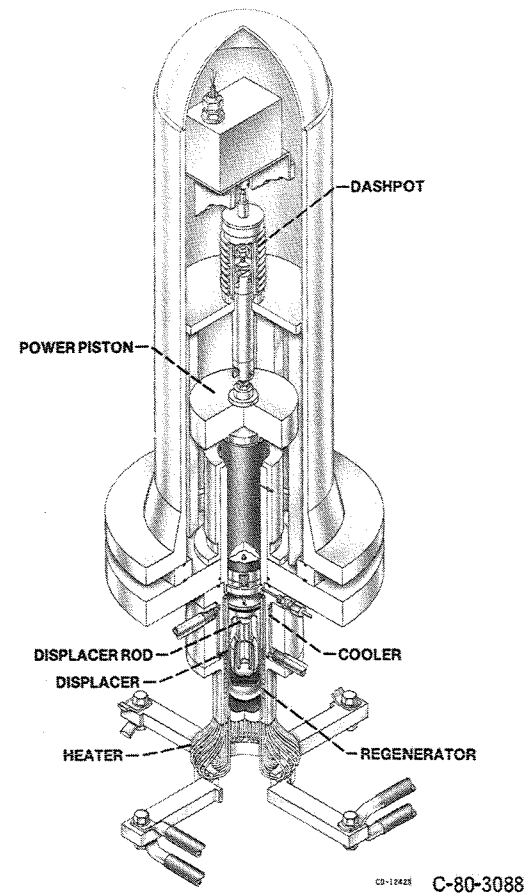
Component layout of RE-1000 Free Piston Stirling Engine.
